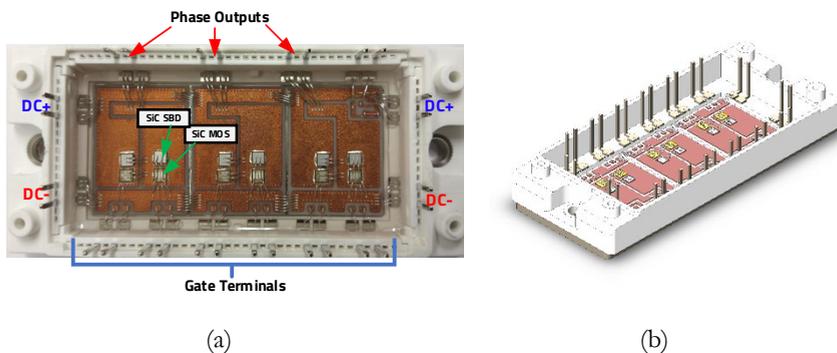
Top view of the SiC module internal layout (a) and 3D CAD geometry (b).
